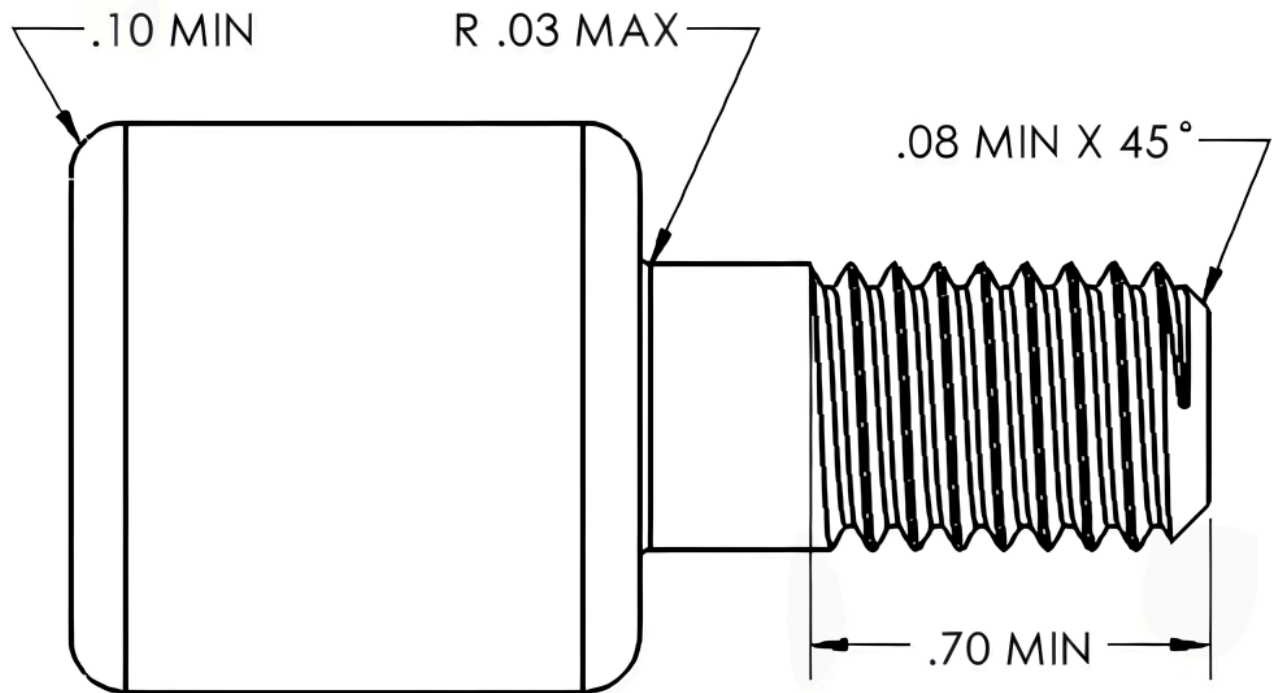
Single-limit dimensions are used to limit the dimensional size only in one direction.
